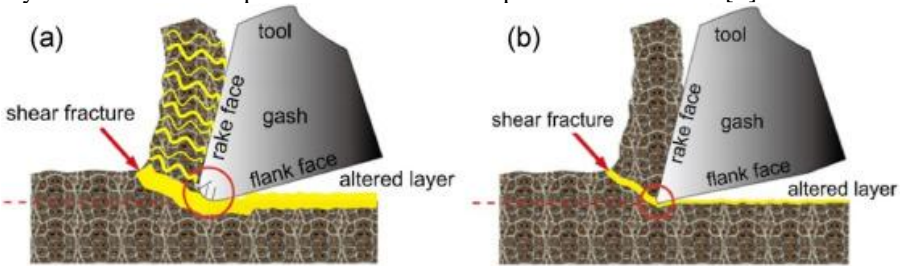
Cutting with a commercial tool (a) and a tool with an edge sharpened using the technology proposed in the study [3] (b): (a) the workpiece is significantly changed by the tool during the cutting process, (b) the workpiece shows minor changes during cutting.
